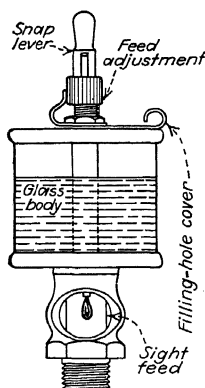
Conventional sight drop-feed oiler with glass body.
